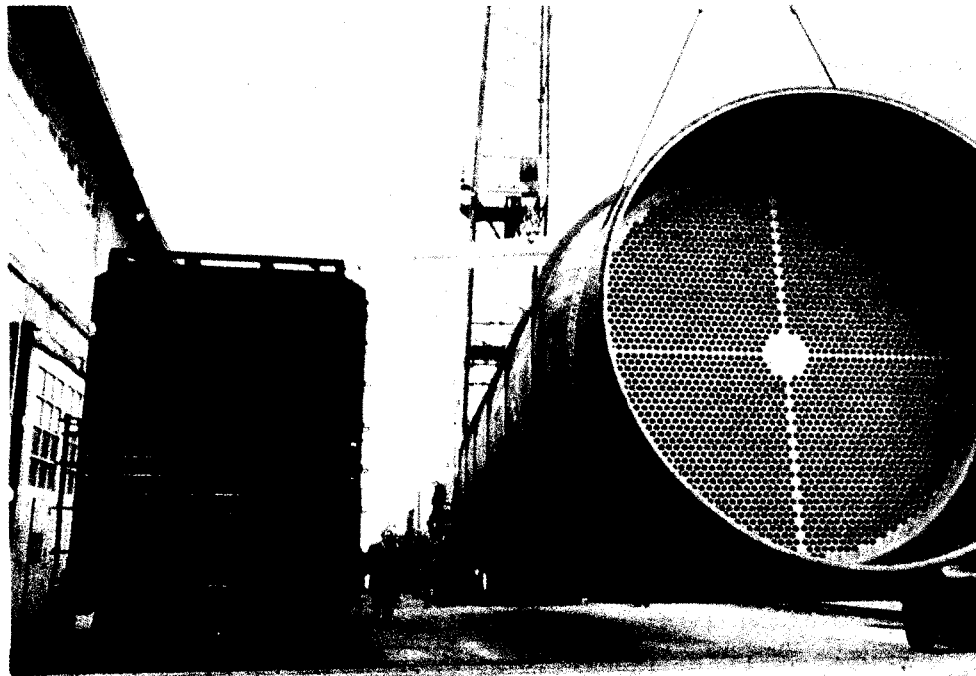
Finished Vessel Fabricated From Explosion Clad Plate (Explosive Fabricators, Inc. photograph)
